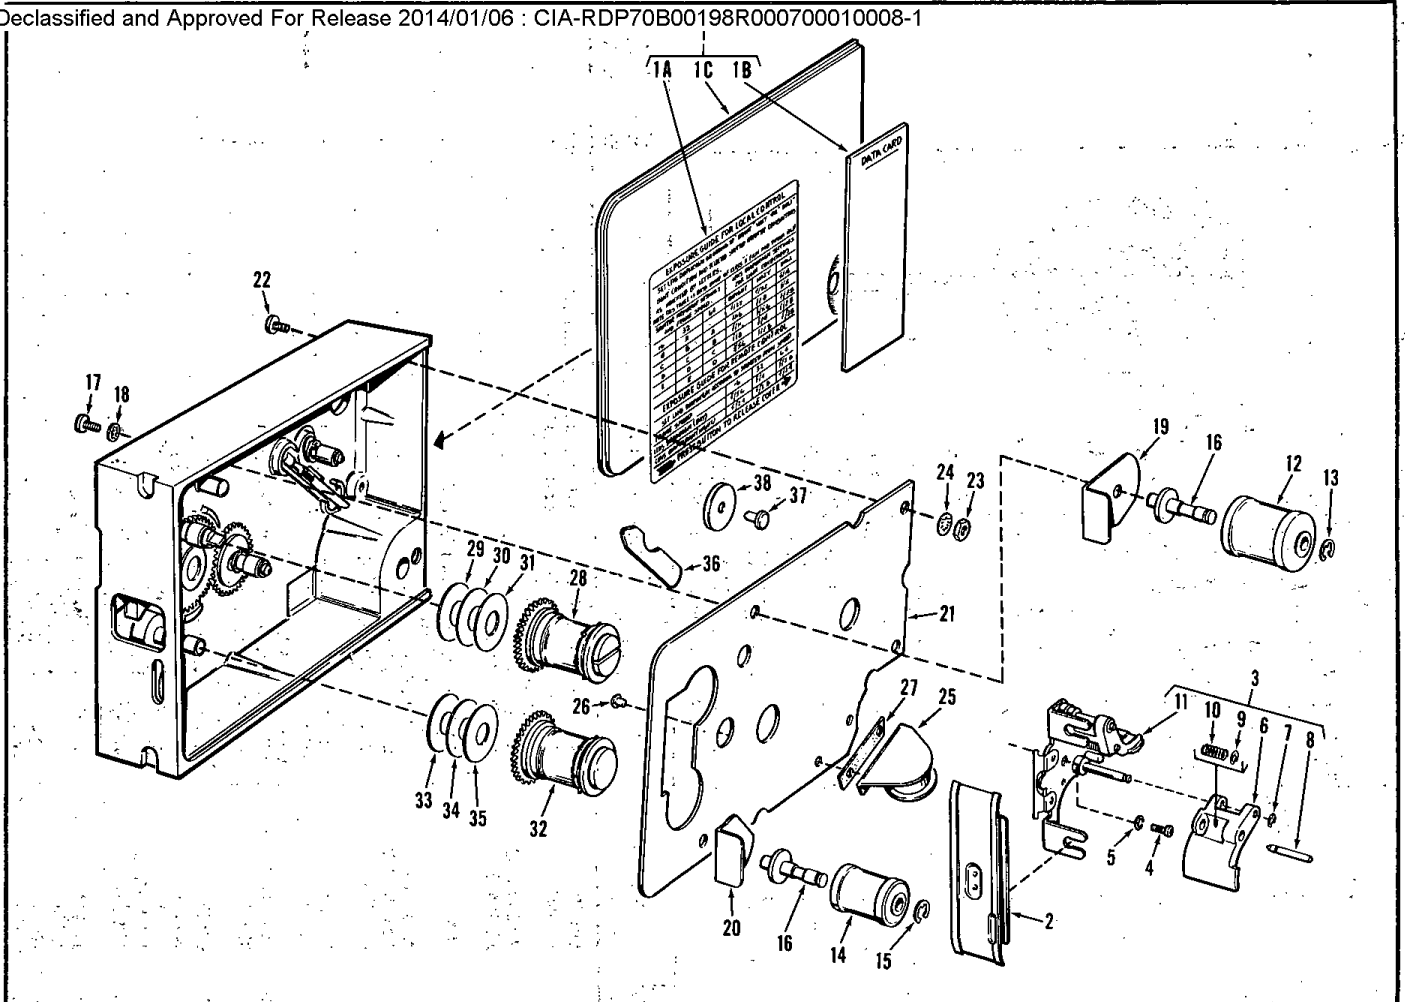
(Sheet 1 of 2) Exploded View of Magazine Assembly
